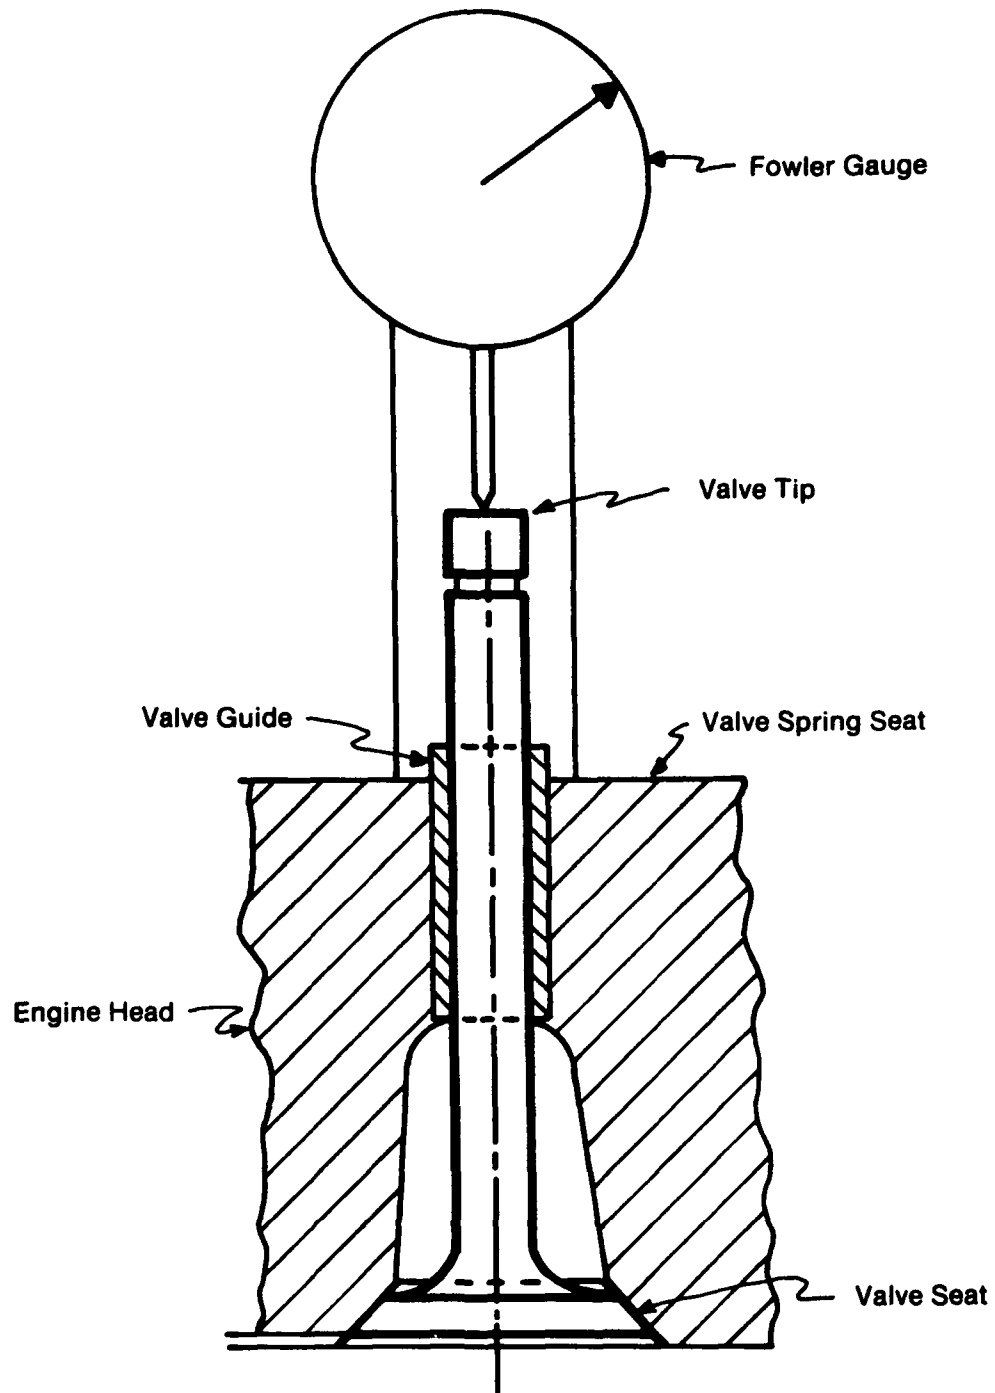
Fowler gauge used for measurement of valve seat recession.
